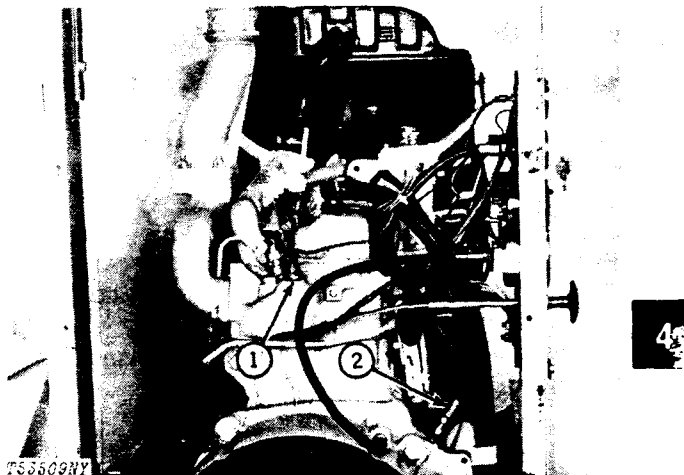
Oil Pressure Hose and Temperature Sending Unit
